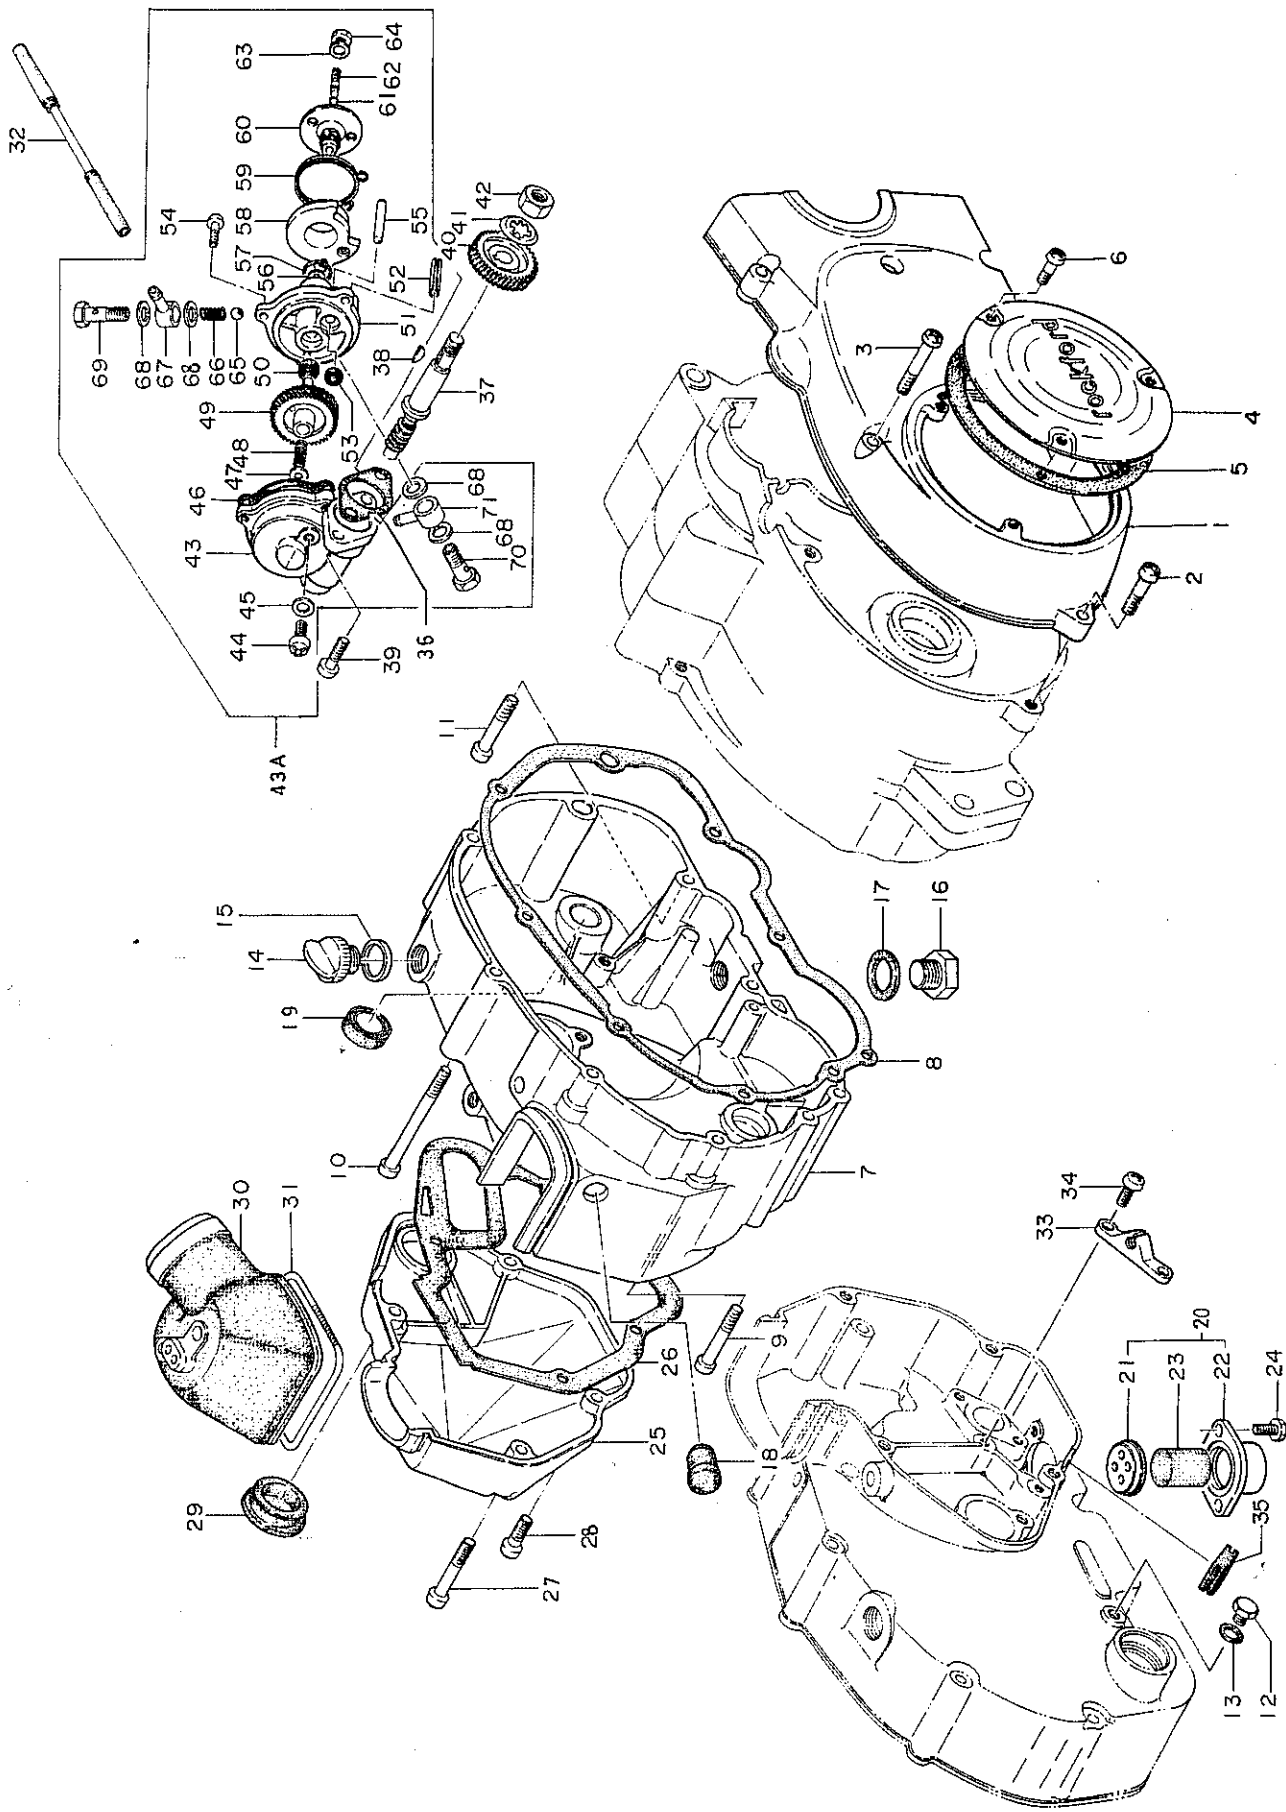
CRANKCASE COVER AND OIL PUMP
